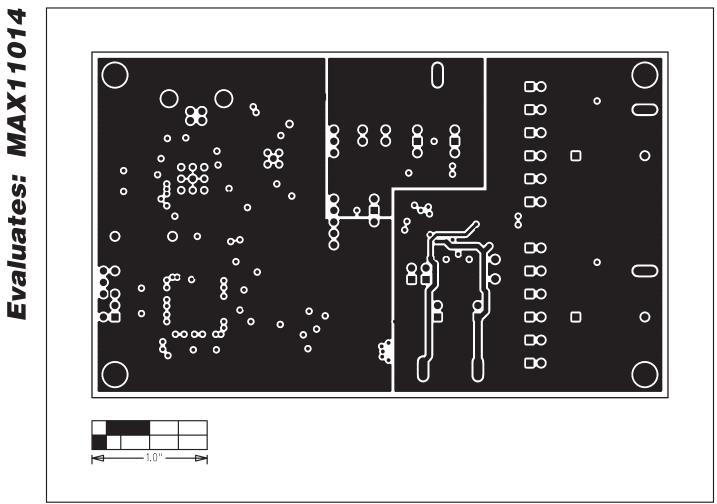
MAX11014 EV Kit PCB Layout—Inner Layer 3
